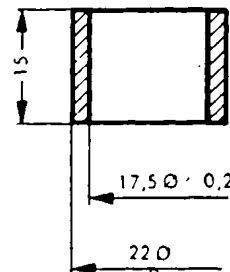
Assembly aid bush for pressing bearing bushes into governor cover.
